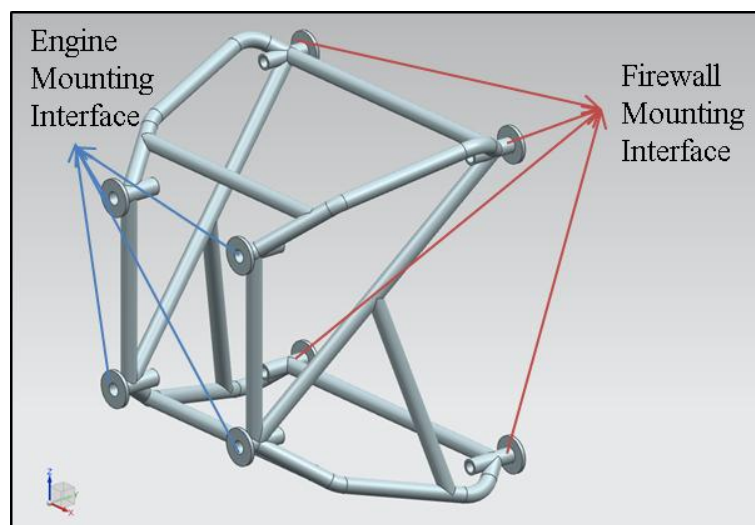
Isometric View of the Engine Mount Frame CAD Modelled in UGNX 12.0
